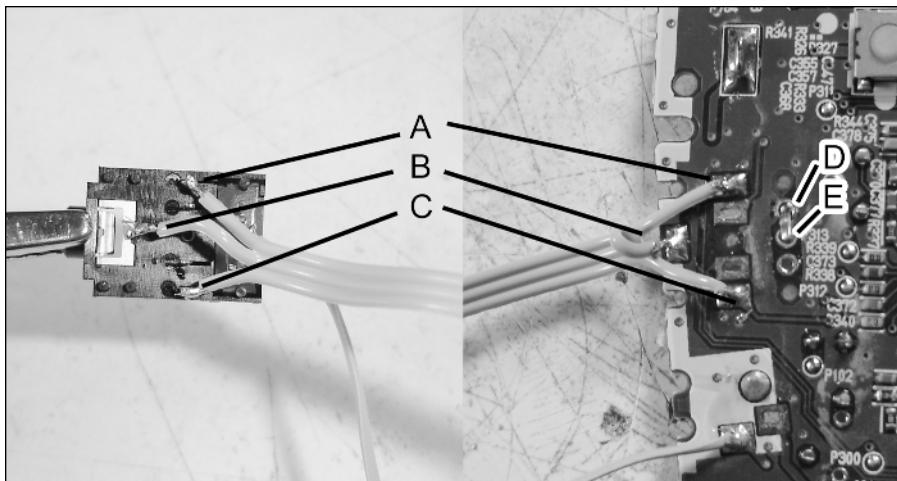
Connect to the plug and board as shown. (Note how wire B is longer on the plug side.)
